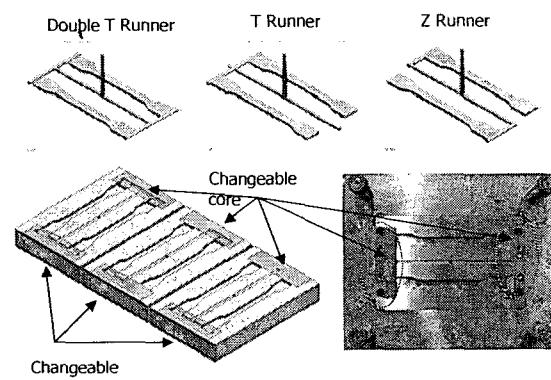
Designed and manufactured view of runner system for tensile test specimen
